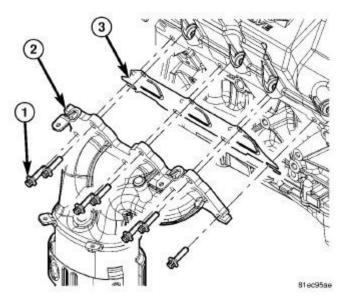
Rear Maniverter Fasteners Courtesy of CHRYSLER LLC
